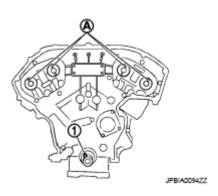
Identifying Dowel Pin And Crankshaft Key Courtesy of NISSAN MOTOR CO., U.S.A.
